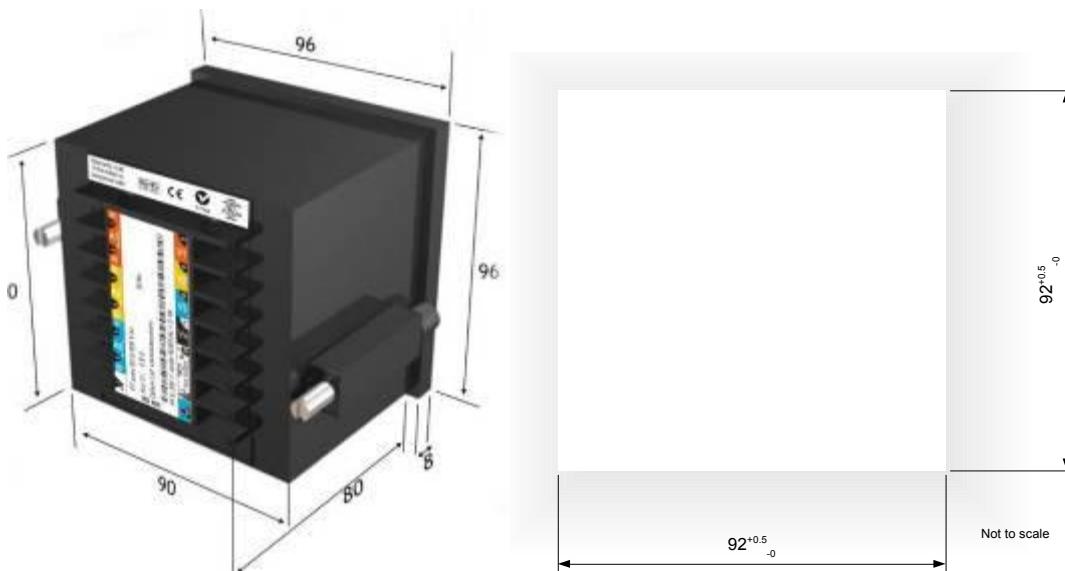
Mechanical dimensions & RECOMMENDED PANEL CUT-OUT 92 X 92 mm
